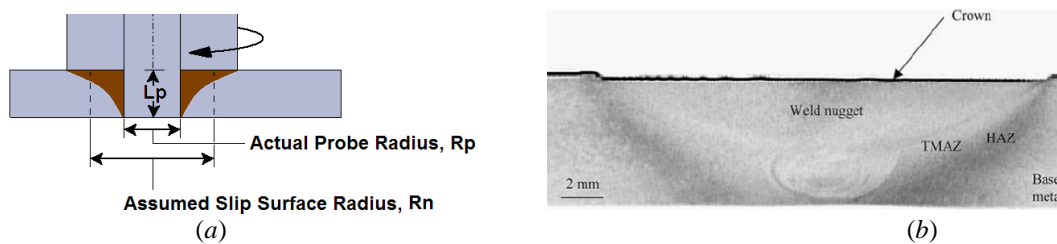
Weld nugget parameters (a) and *weld nugget* macrograph (Chen and Kovacevic, 2003) (b).
